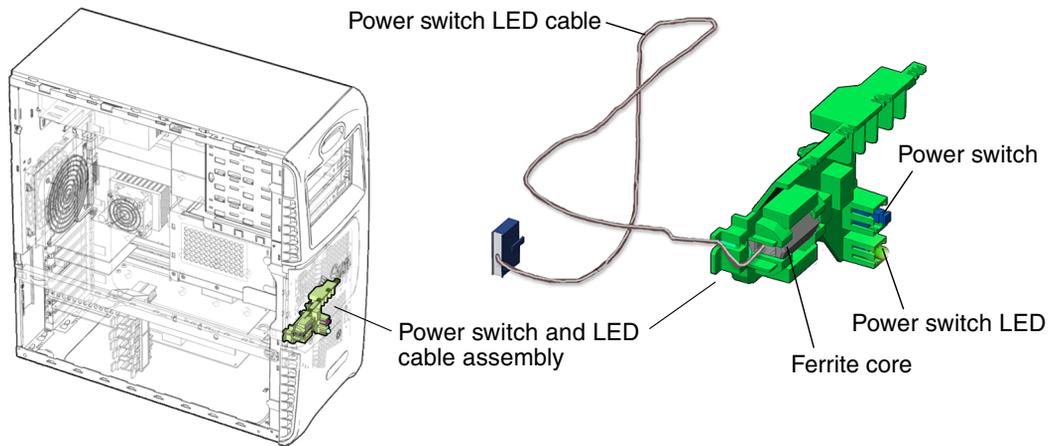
Power Switch and LED Cable Assembly Location and Identification
